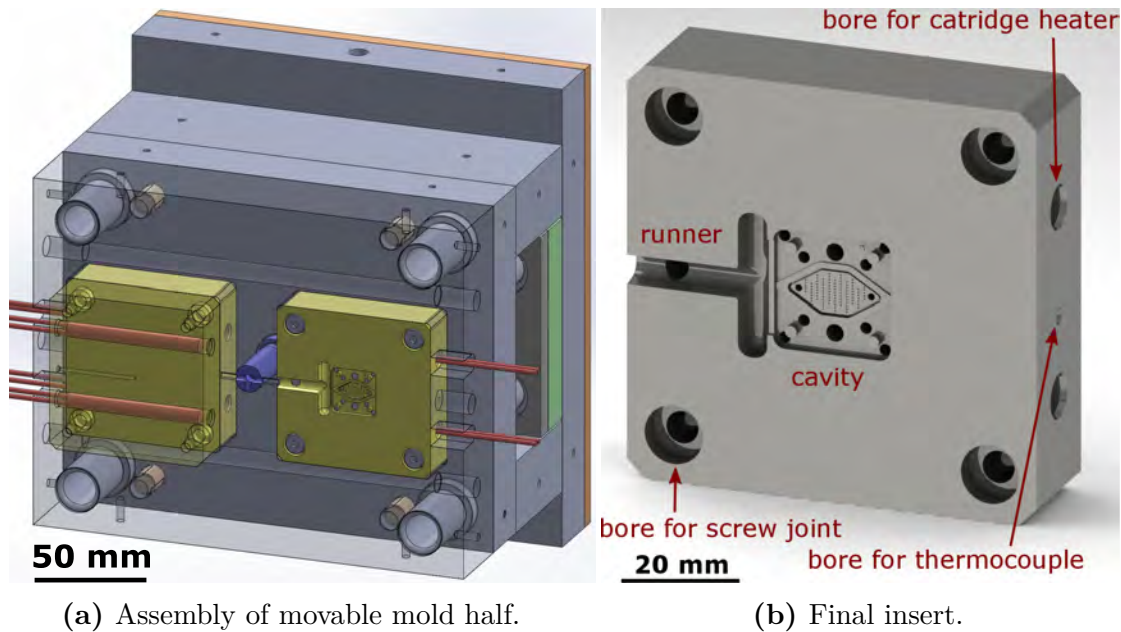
CAD models of the final, realized mold concept with inserts fixed by four screw joints and liquid heating of the cavity plates and electrical heating of the inserts.
